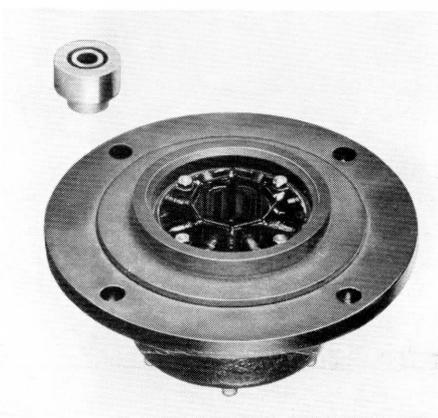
Rotor and flange-mounted cast iron case for stator—Weston Model 758 Type GF.
